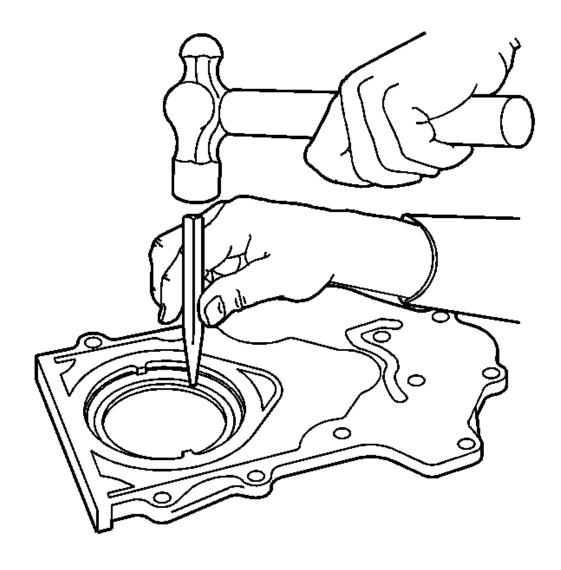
Locating Crankshaft Rear Oil Seal In Housing Courtesy of GENERAL MOTORS CORP.
